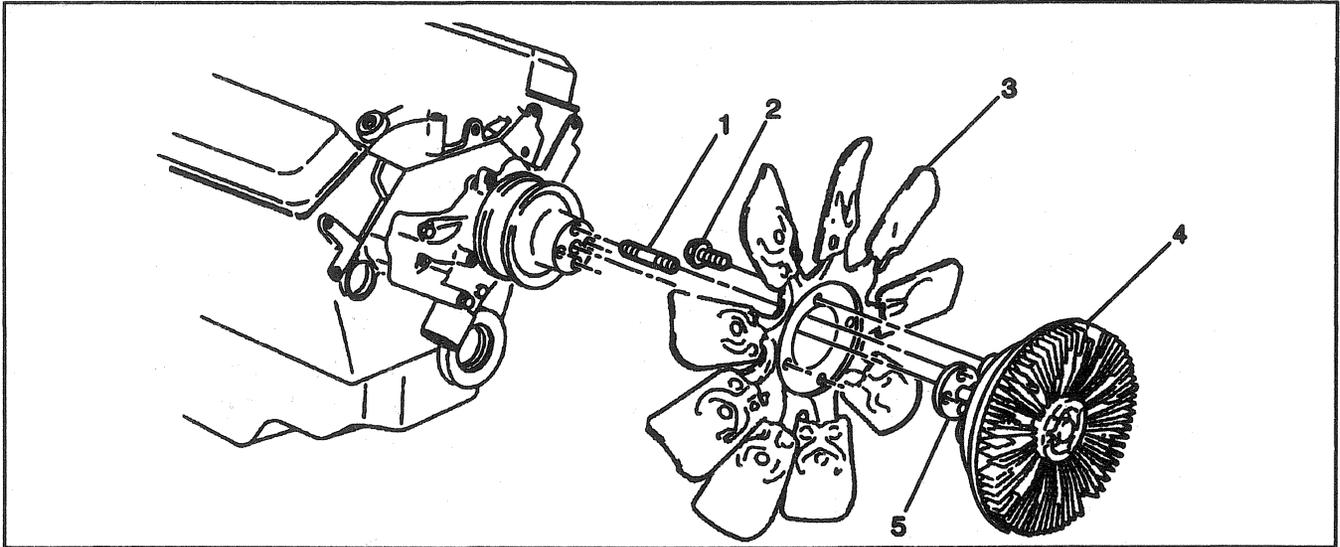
Radiator Fan and Fan Clutch (7.4L and Diesel Engines)
